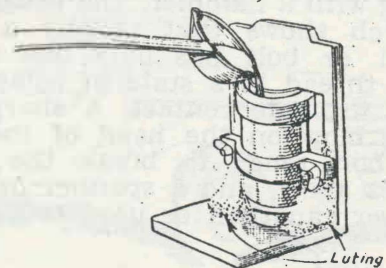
Pouring the bearing. Any leakage points are sealed with luting or clay and the metal is poured in a steady stream until the bearing is full.
